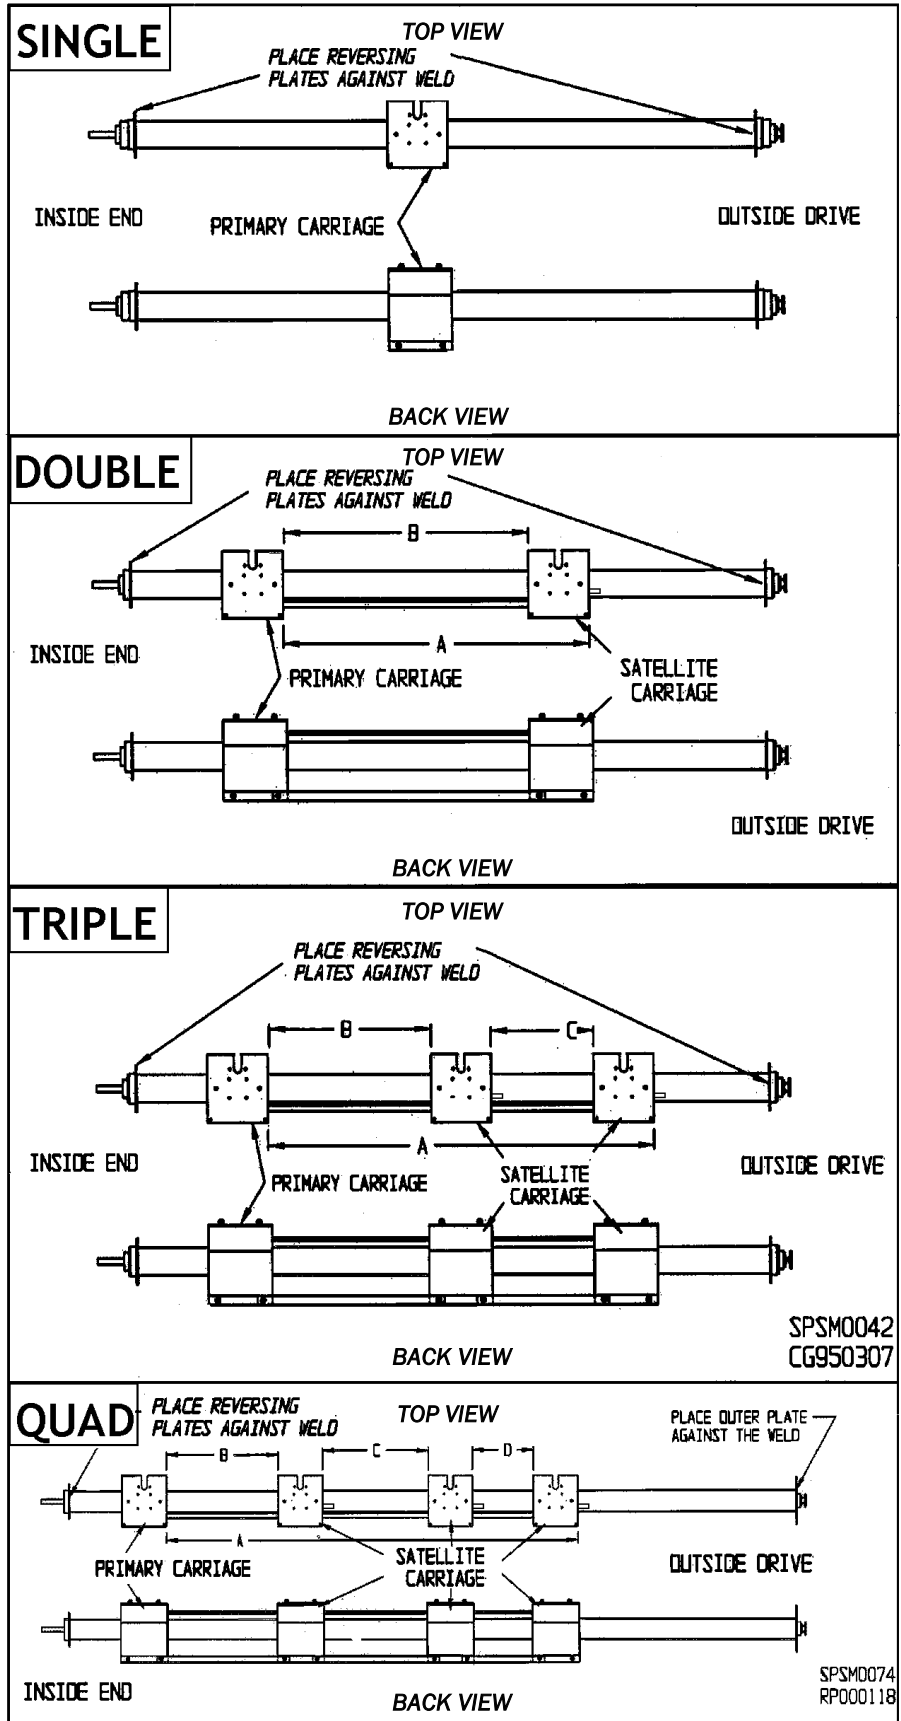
Tie Bar and Carriage Placement for Fastir Units
